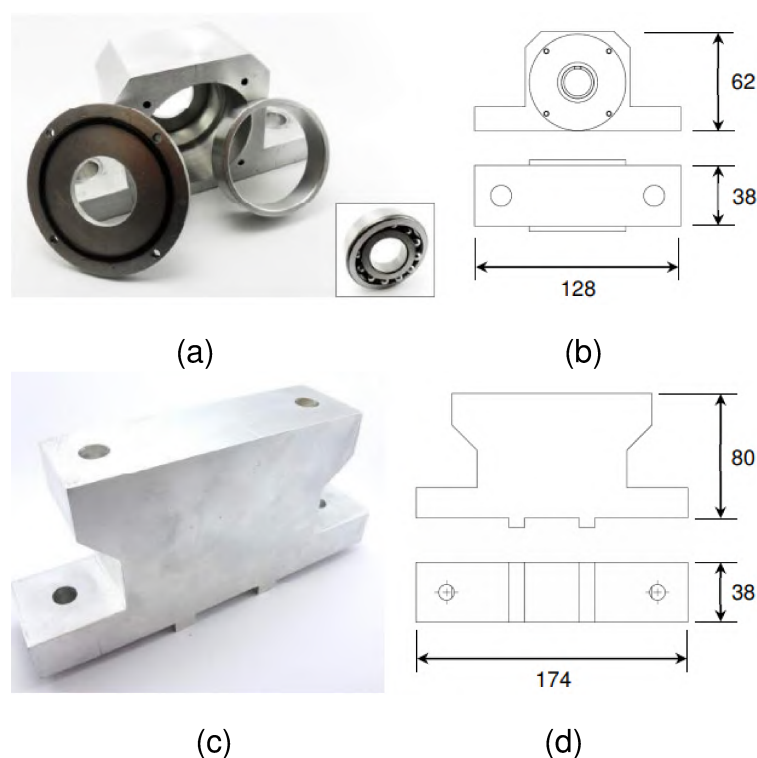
Self-aligning bearing: a) details of its components; b) main dimensions (mm); c) base to connect the bearing to the aluminum frame; d) geometry of the base.
